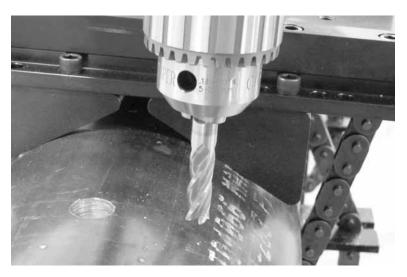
Lower the end mill to check its alignment with the drilling position.
